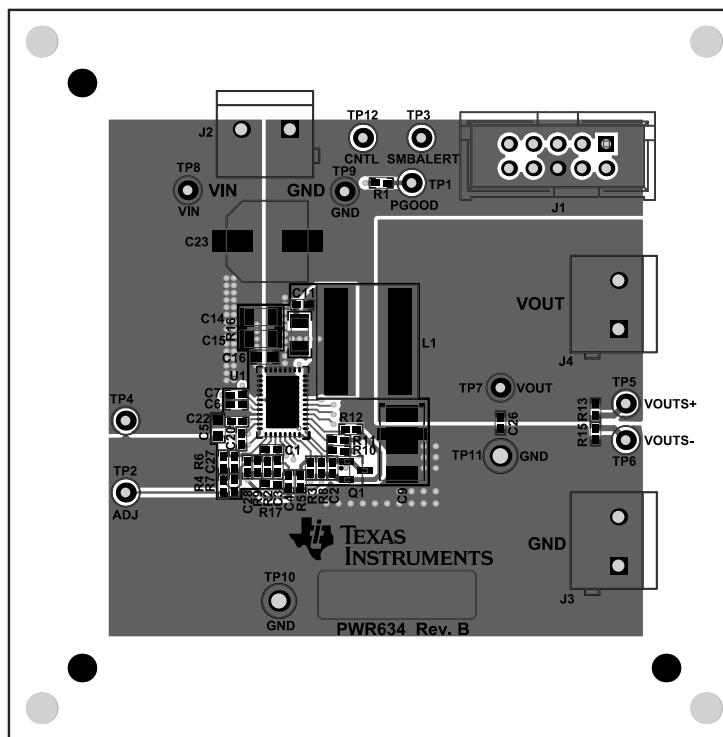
PWR-634EVM Top Layer Assembly Drawing (Top View)
